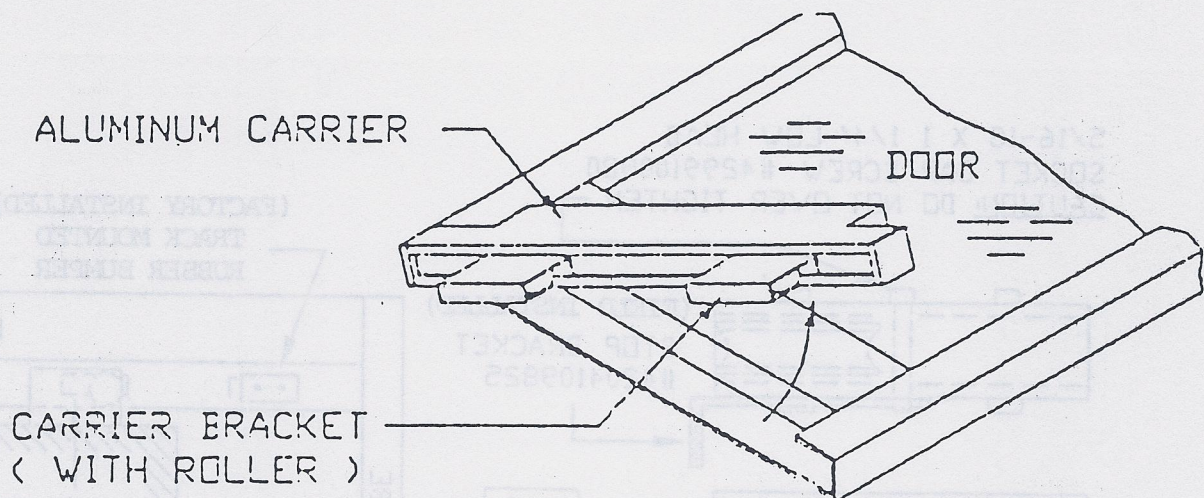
CARRIER BREAKOUT/CARRIER BRACKET REMOVAL
